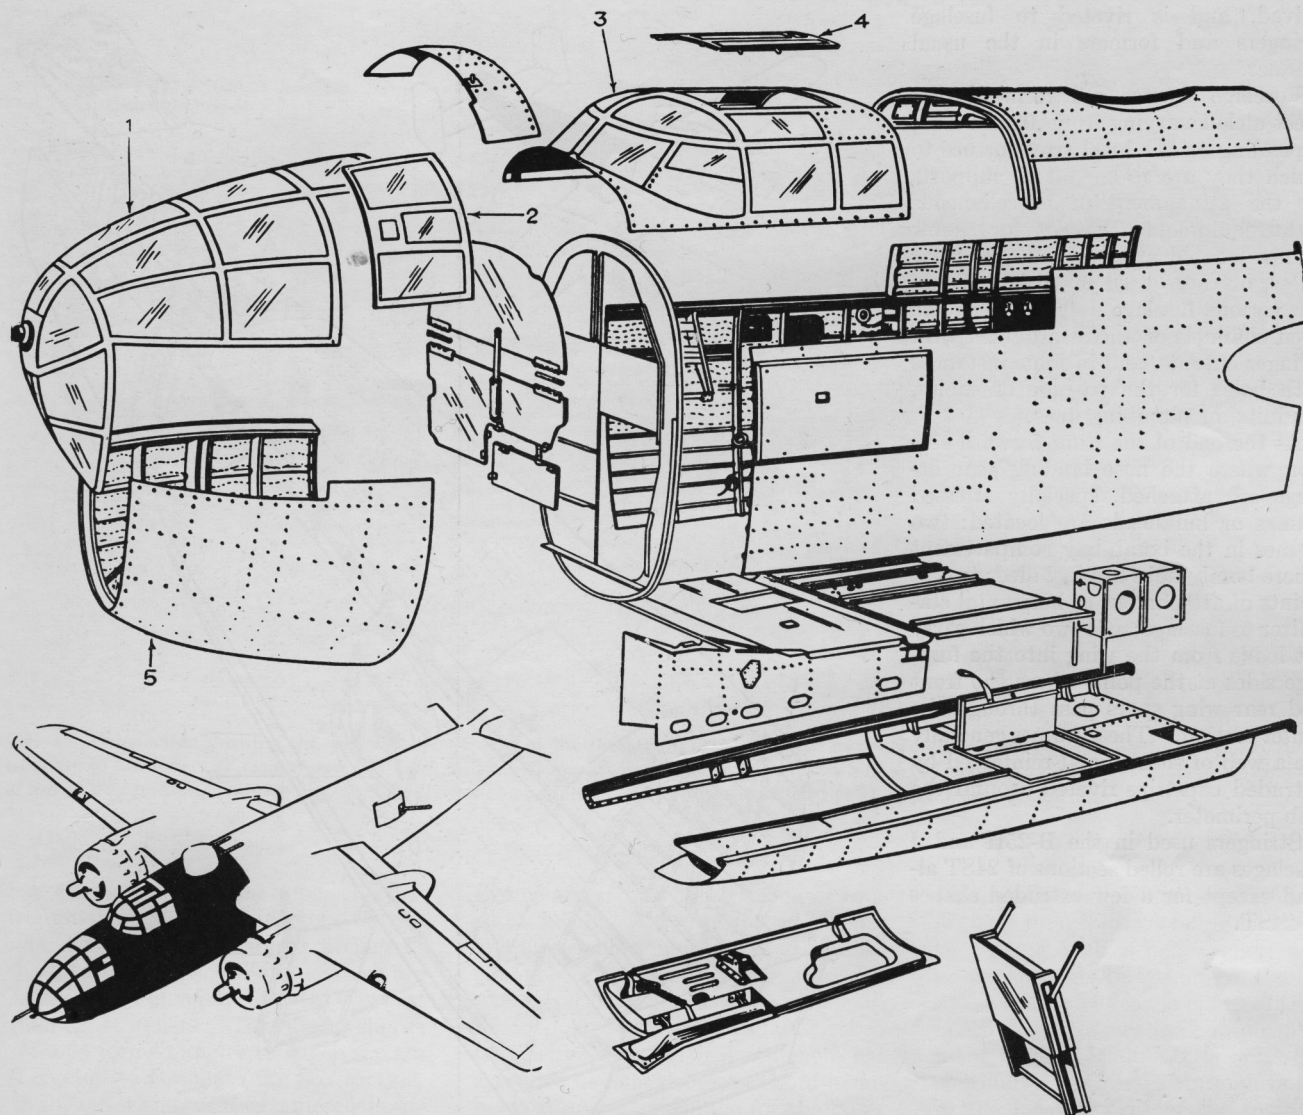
B-25J front fuselage frame assembly: (1) and (2) bombardier's enclosure and escape hatch, respectively; (3) and (4) pilot's-compartment enclosure and escape hatch, respectively; (5) fuselage front lower assembly.
